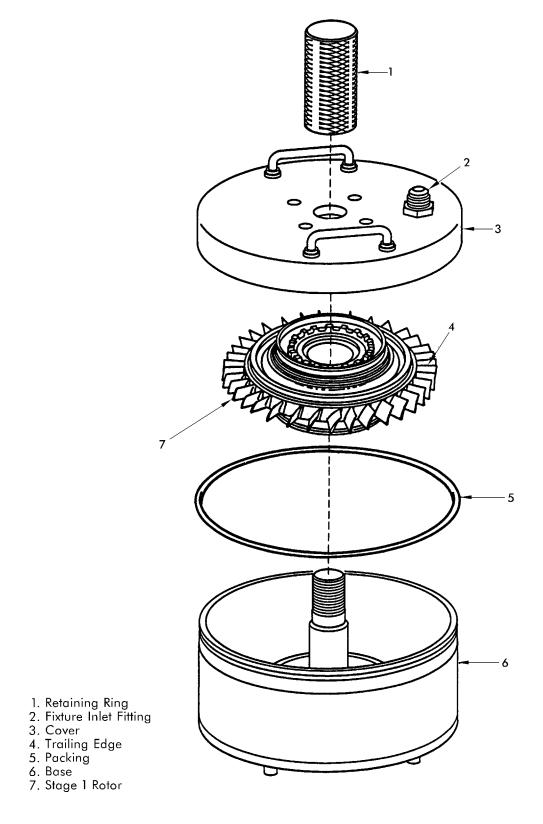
Stage 1 Gas Generator Rotor Reverse Pressure Flushing Fixture 21C7786G01
